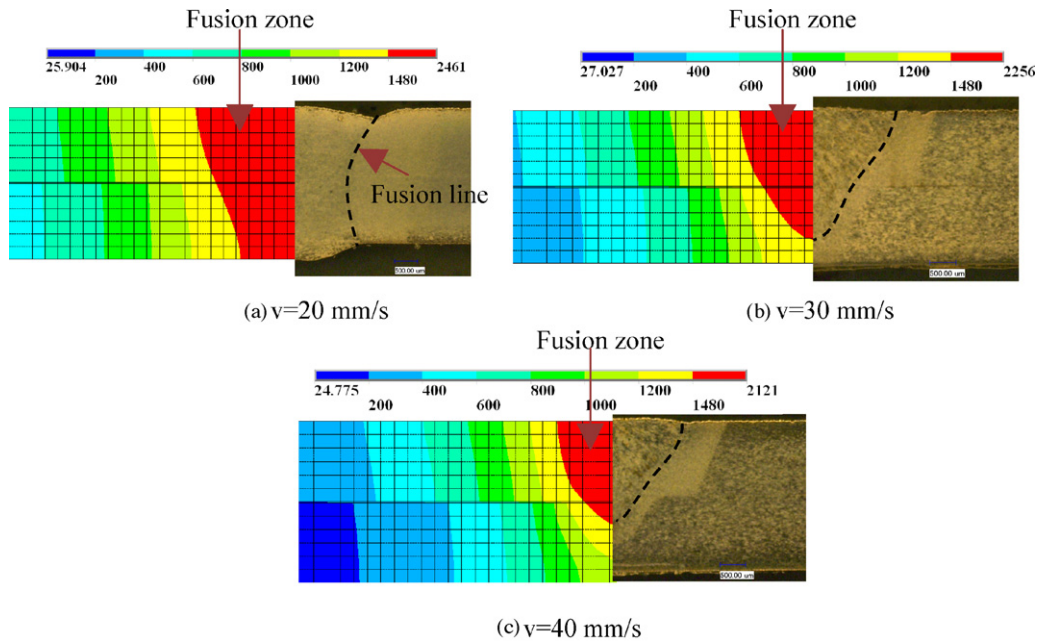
Modeled temperature contours across the weld bead versus the cross-sectional micrographs of weld obtained by laser/arc hybrid welding at different welding speeds: (a) $v = 20$ mm/s, (b) $v = 30$ mm/s, and (c) $v = 40$ mm/s (laser power is 3 kW, and arc current is 160 A).
